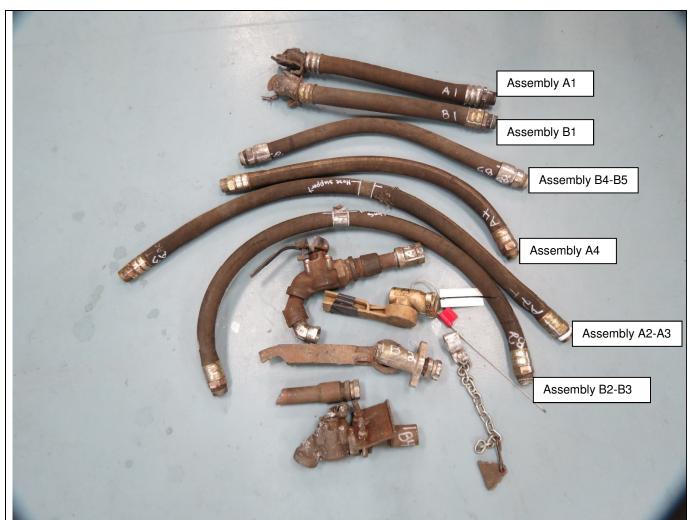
Received assemblies and components. The assemblies will be referred to throughout the report as labeled in the Figure above.
